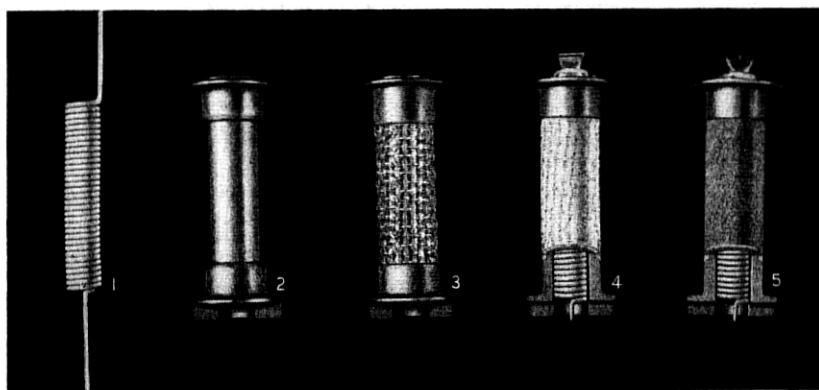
725A cathode construction. Shown are: (1) the heater element; (2) the machined nickel cathode blank; (3) the cathode blank with the nickel wire mesh, welded or sintered in place; (4) the mesh type cathode with oxide coating applied, cut away to show heater element in place; (5) the more recent cathode with sintered, nickel powder, matrix base (uncoated).
